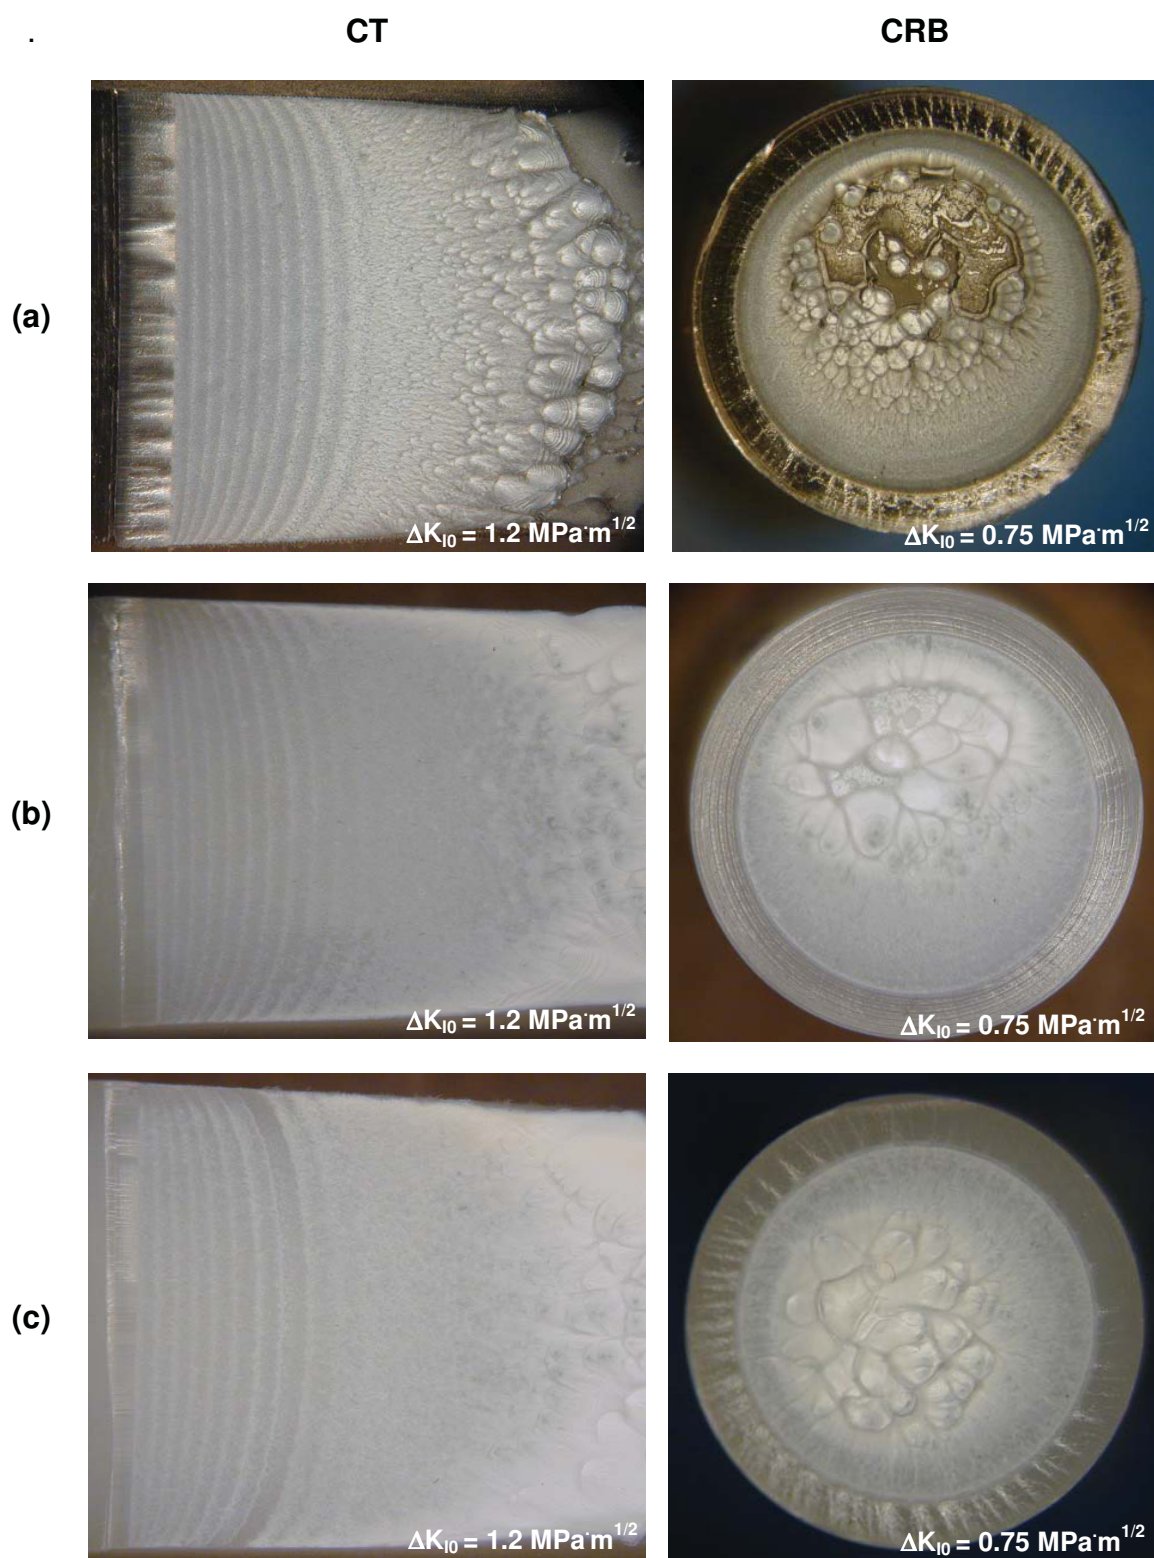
Optical photos of the fracture surfaces of the materials investigated using CT and CRB specimens: (a) PE100-1, (b) PE100-2 and (c) PE100-3 (23 °C, 5 Hz, R = 0.1).
